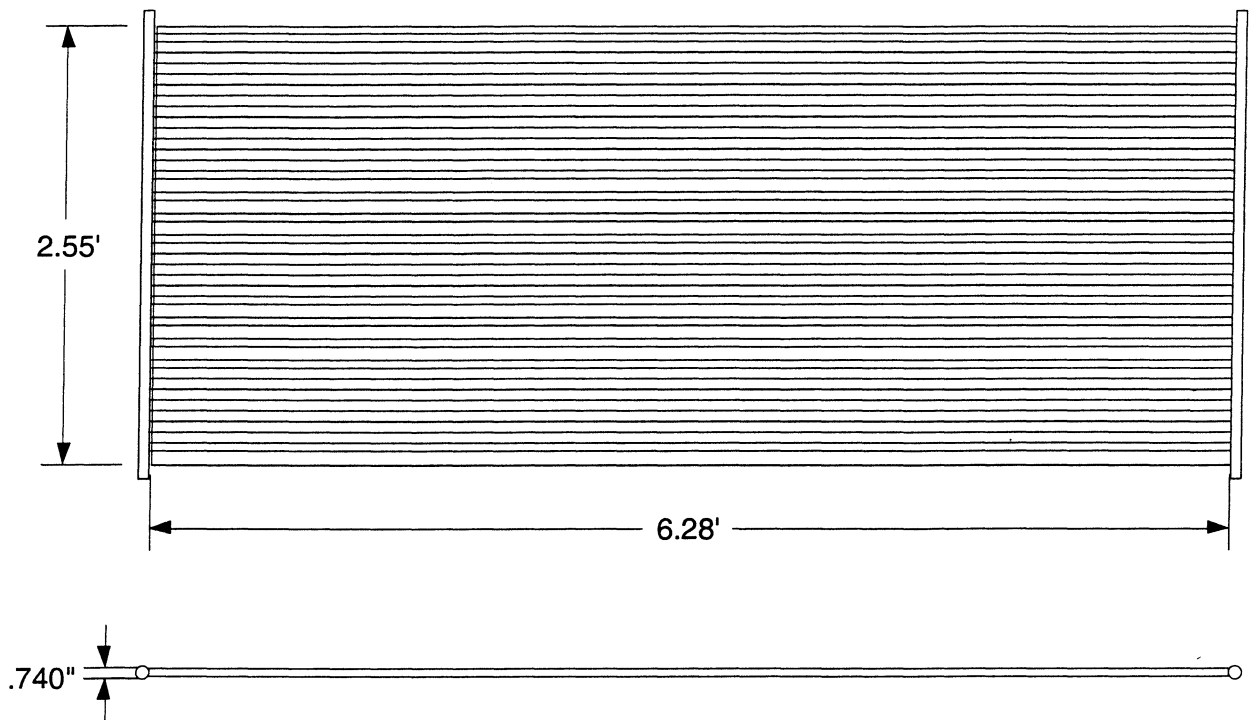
Dimensions of 2.55 ft square footprint condenser design
